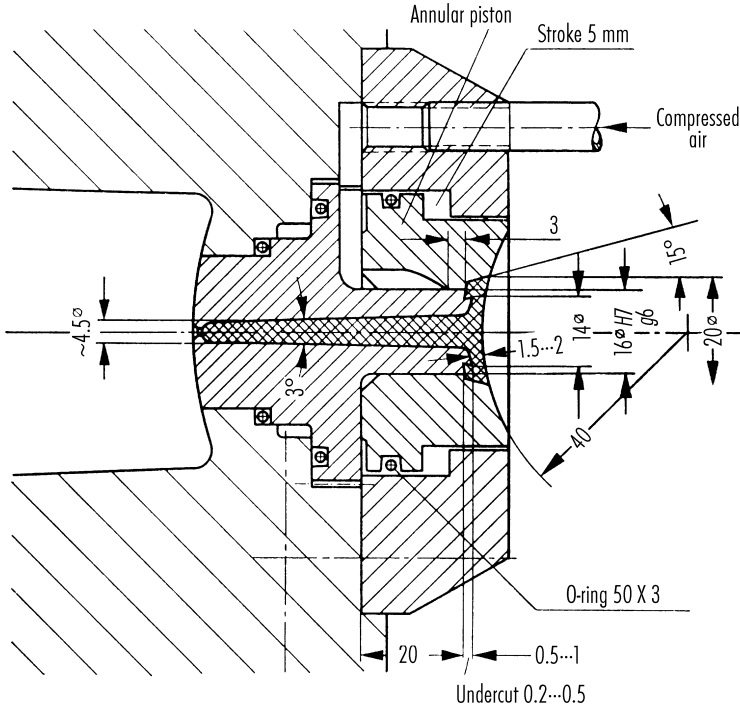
Reversed sprue with pinpoint gate and pneumatic sprue ejector [6.12] Dimensions in mm
